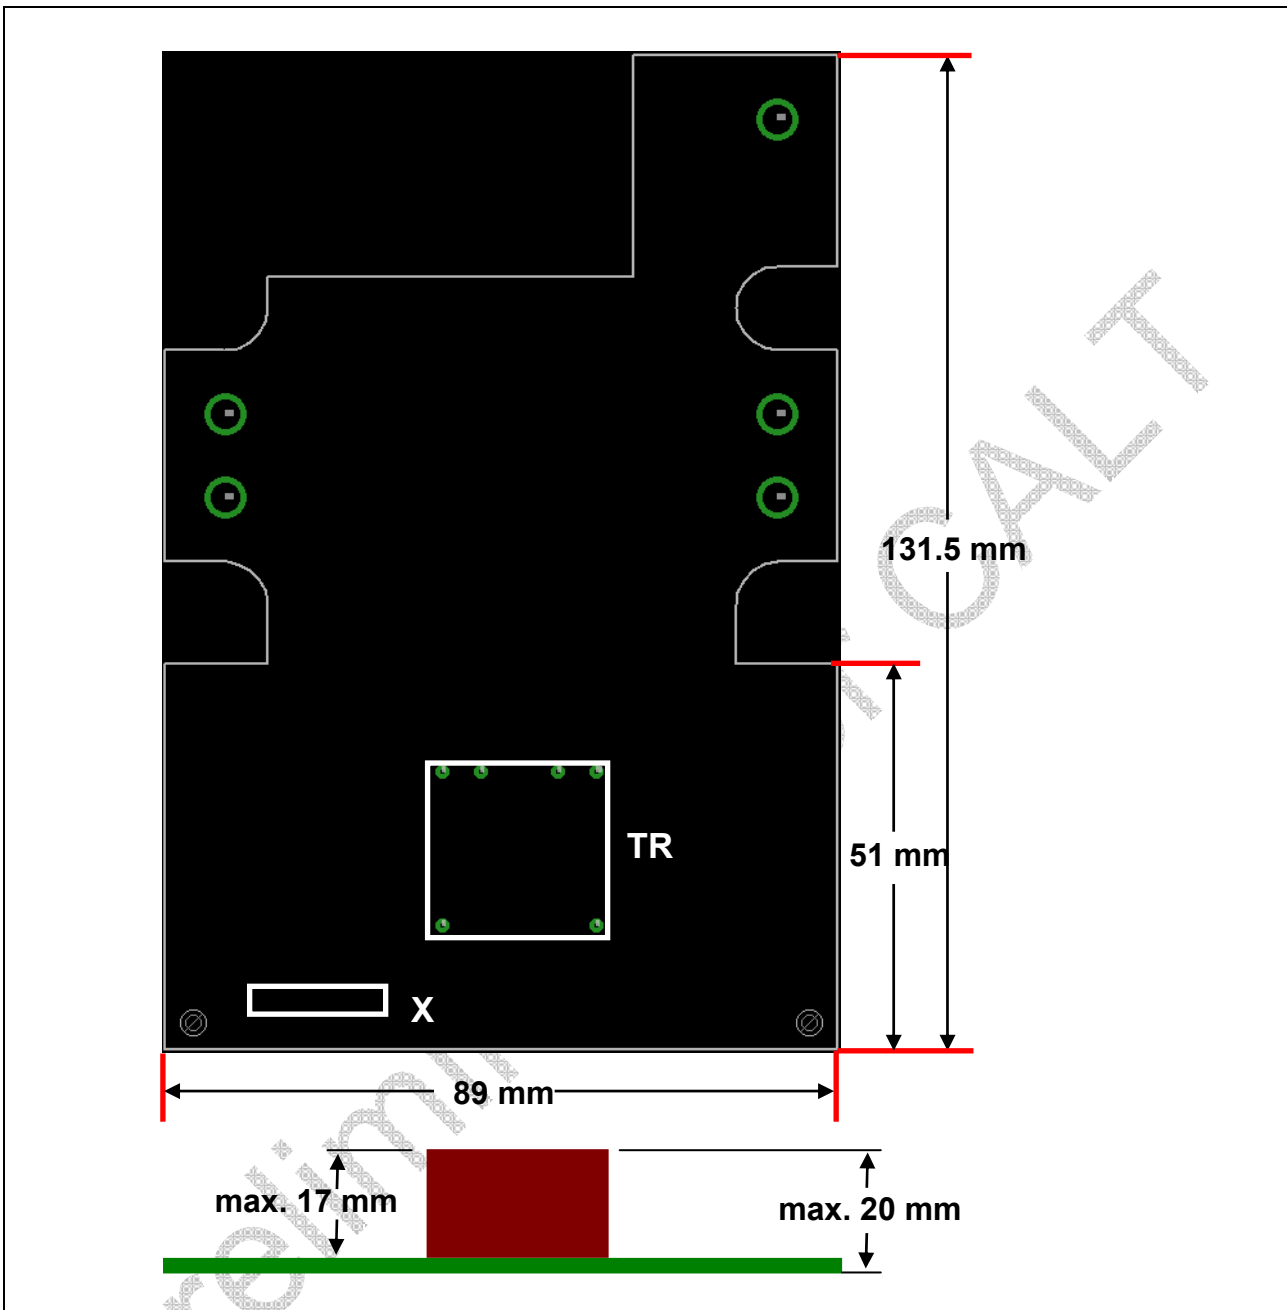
Dimensions of the 2ED250E12-F Evaluation Driver Board
